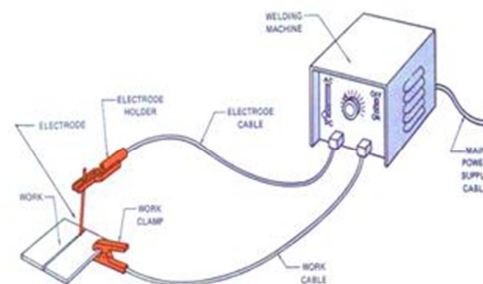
SMAW (Shielded Metal Arc Welding)
